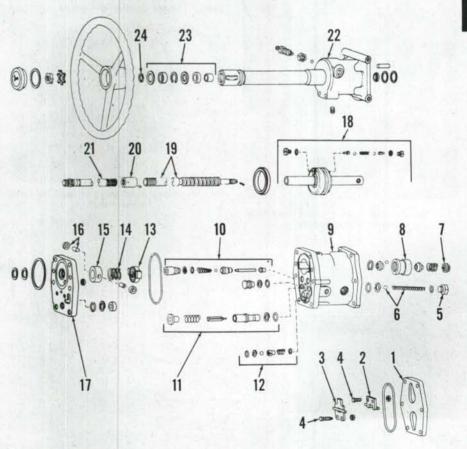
Exploded view of steering valve assembly showing component parts. No mechanical linkage exists between steering valve and steering bellcrank.
